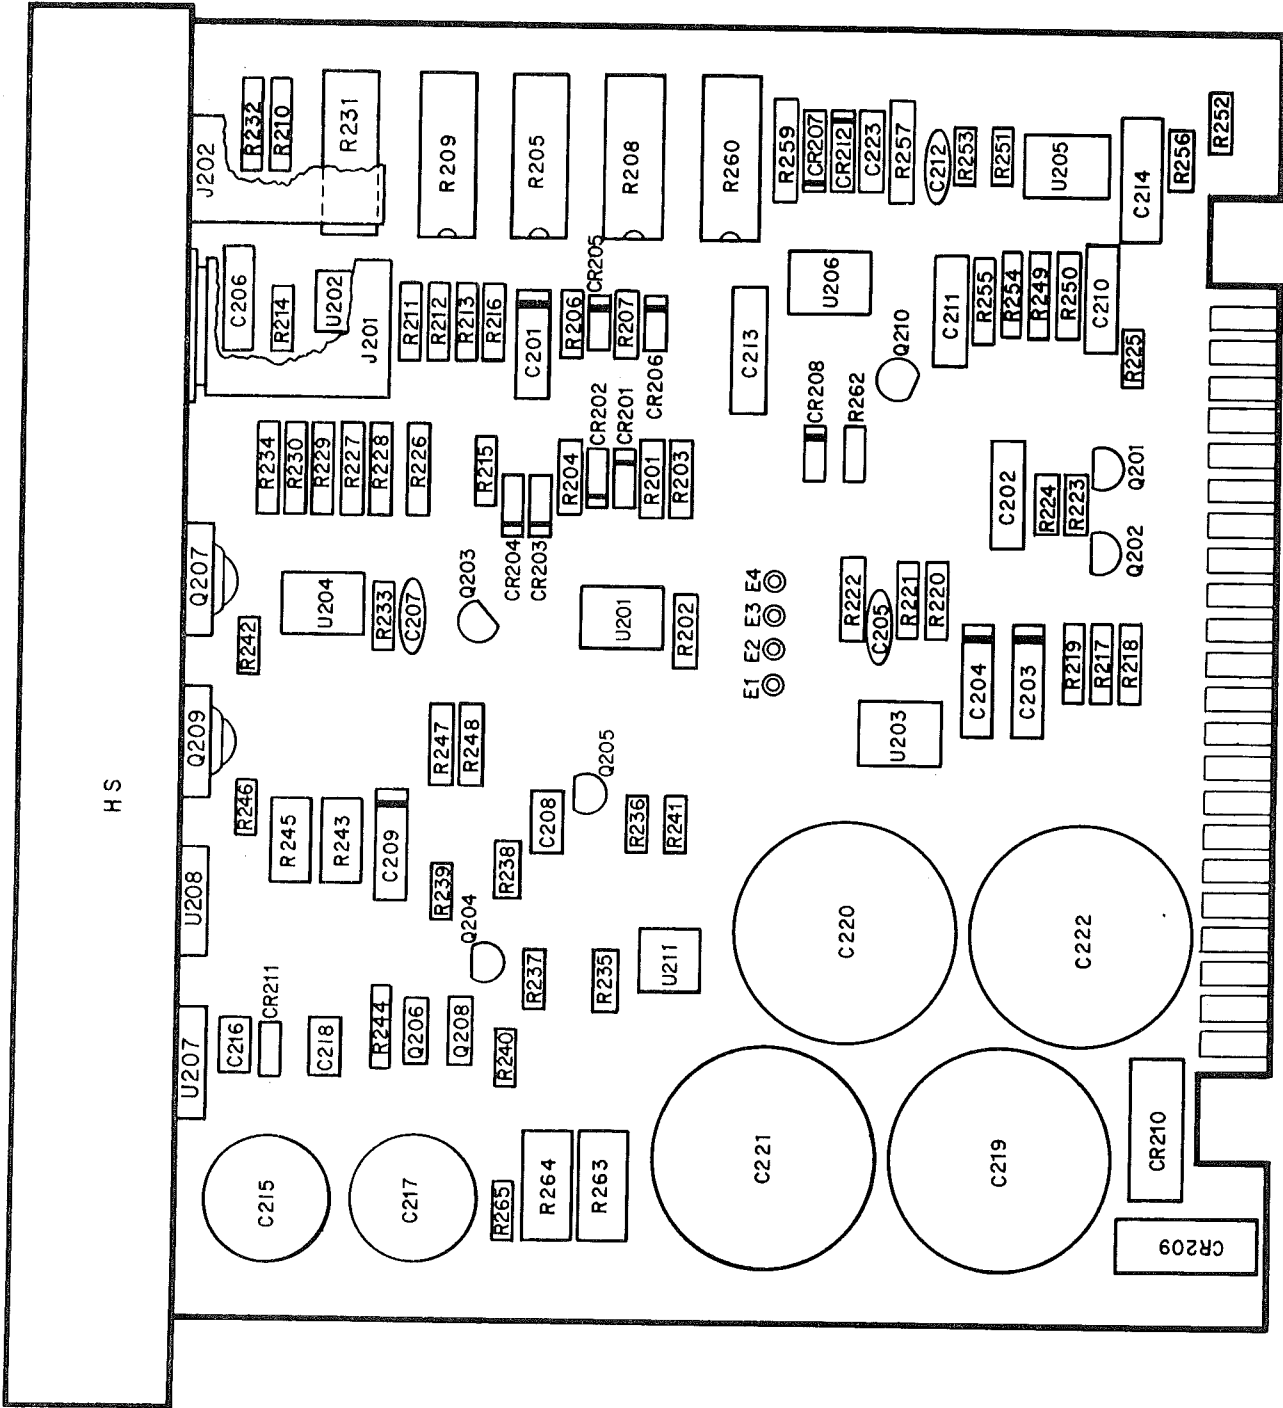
DRIVE AMPLIFIER BOARD ASSEMBLY
